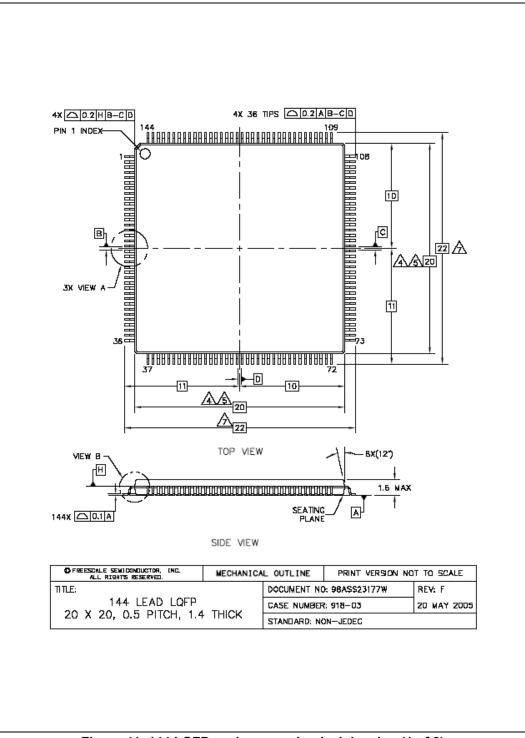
144 LQFP package mechanical drawing (1 of 2)
